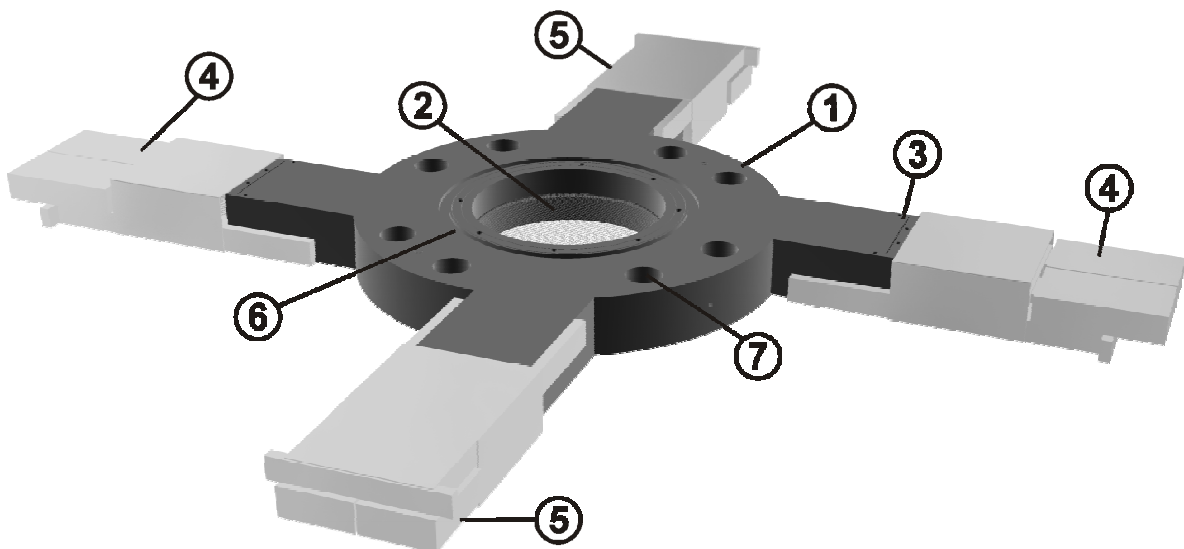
CAD image of the complete sensor for a 195 mm inner diameter pipe, 64x64 electrodes:
